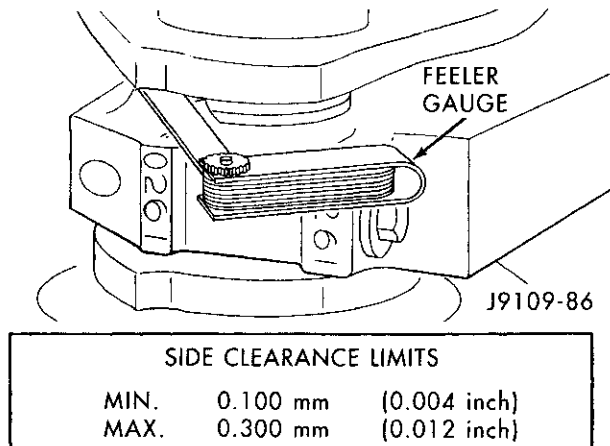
Side Clearance between Connecting Rod/Crankshaft
